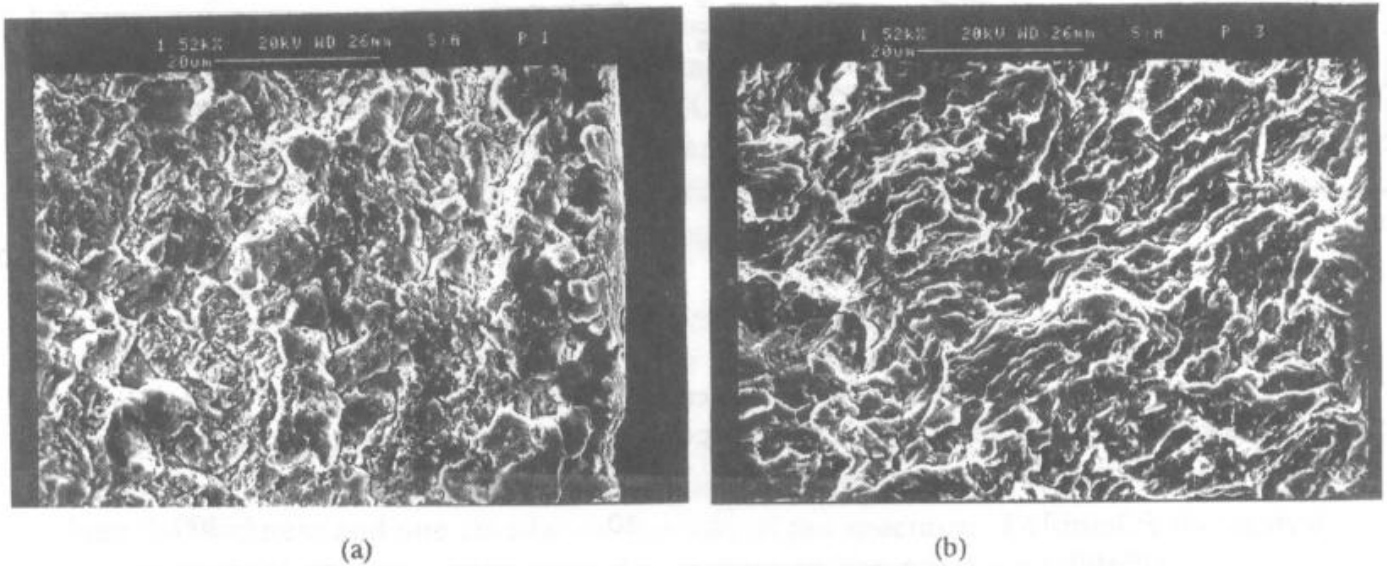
Fracture section of a carburized Bruggen specimen: a)hardened layer; b) core.
